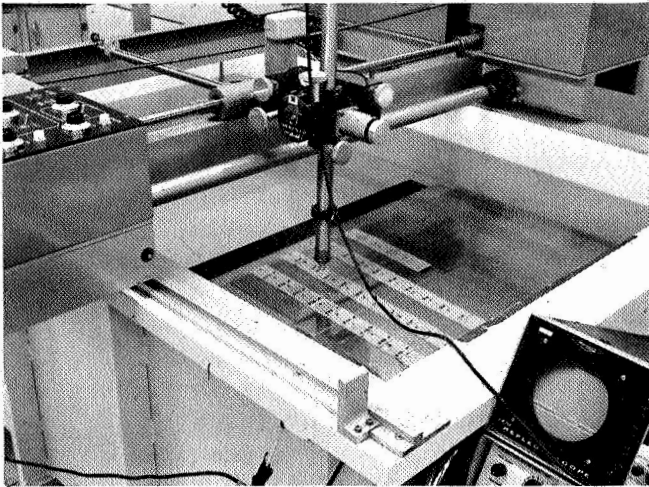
Ultrasonic Inspection of .016-in. Welding Samples
